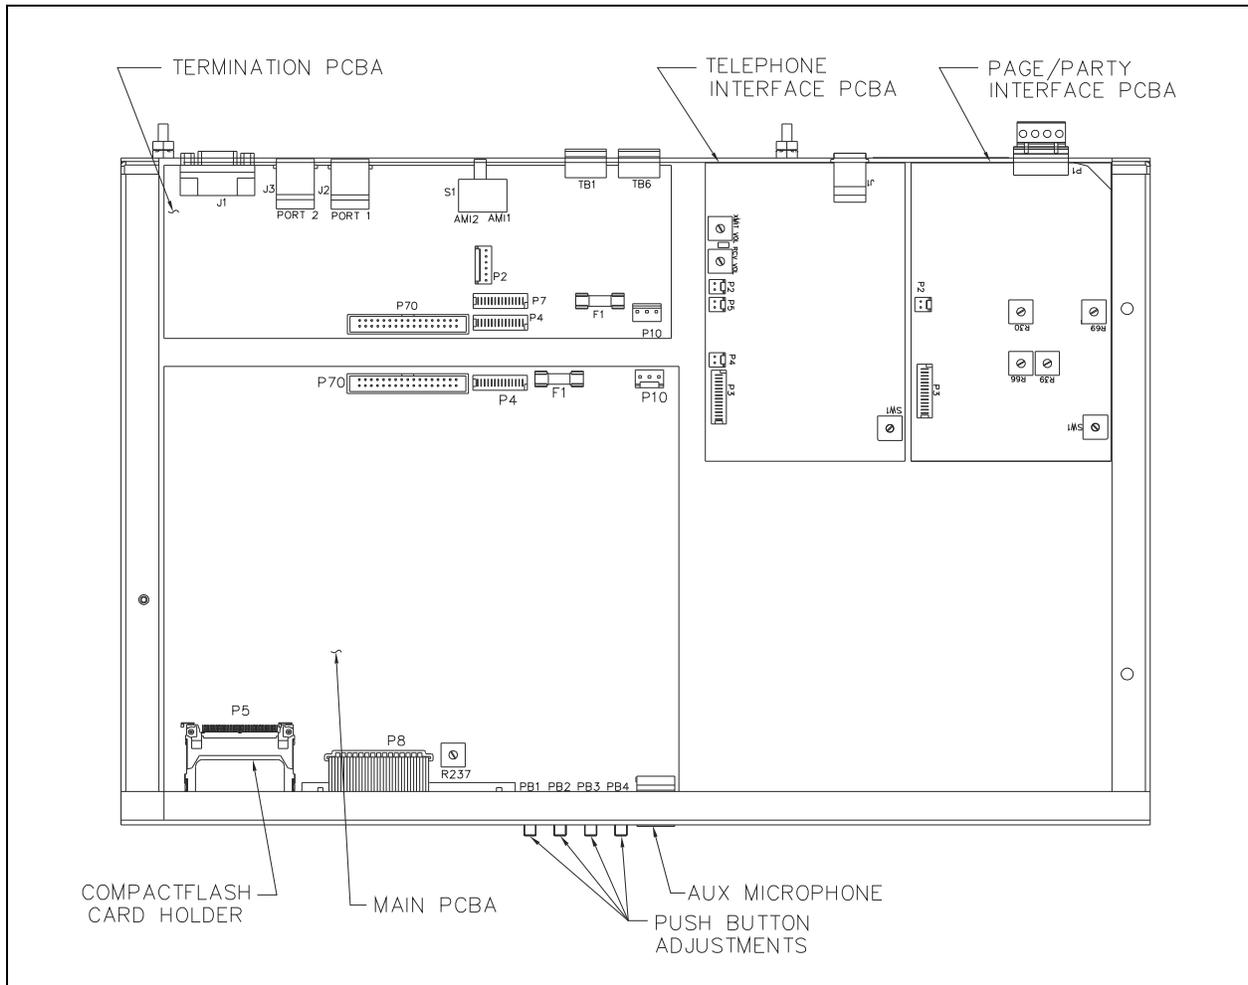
Model 10959-209 AMI without cover (all boards installed).
